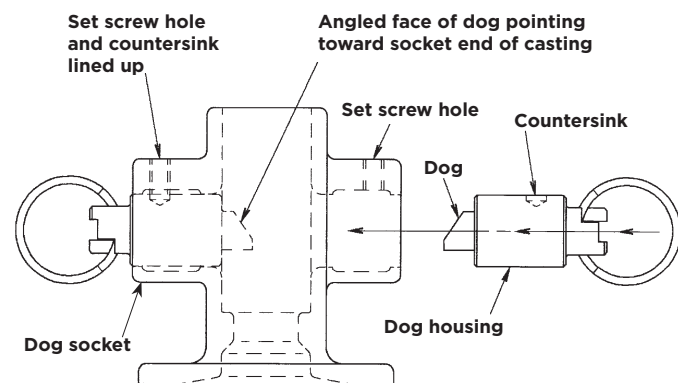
Cross Sectional View of Locking Dog Assembly Showing Proper Dog Placement
